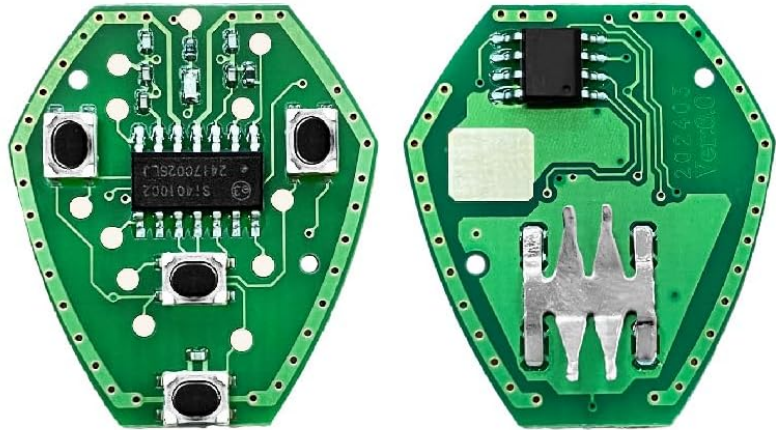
Internal components of the key fob, highlighting the PCB, battery, and chip.
